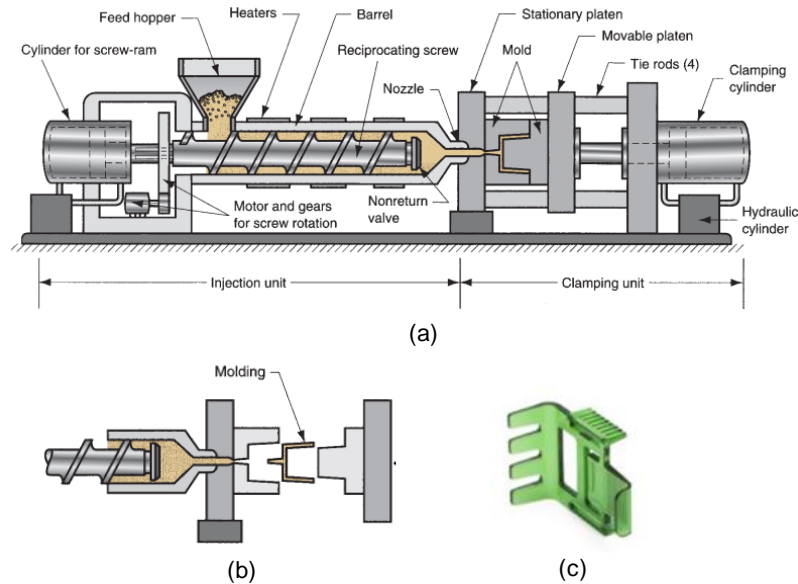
(a) Simplified injection molding diagram (b) detail of the molding produced (Groover, 2013) (c) example of a part produced
